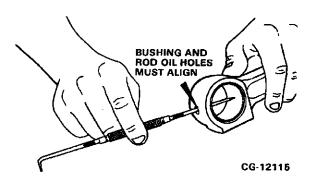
Check Bushing and Rod Oil Hole Alignment
